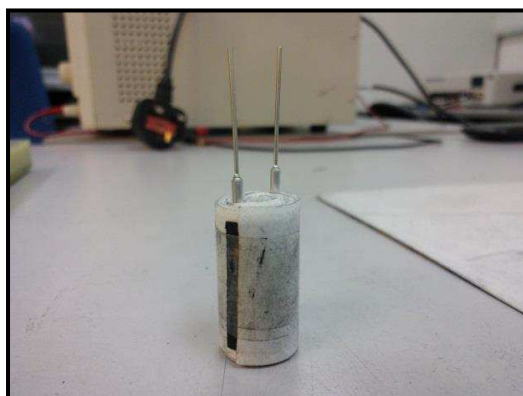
Process of Lead Attachment using Ultrasonic Welder Machine
